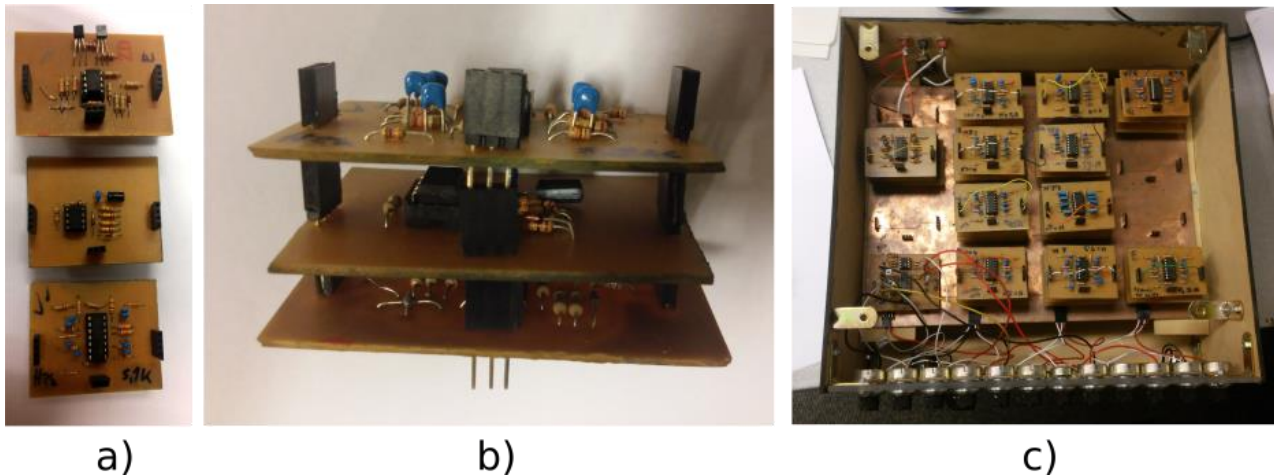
a) From top to bottom: VCA, EF and BPFs modules. b) Assembled processing unit. c) Main board with processing units.
